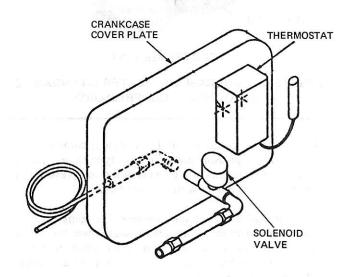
OIL COOLER (HALOCARBON COMPRESSORS)
